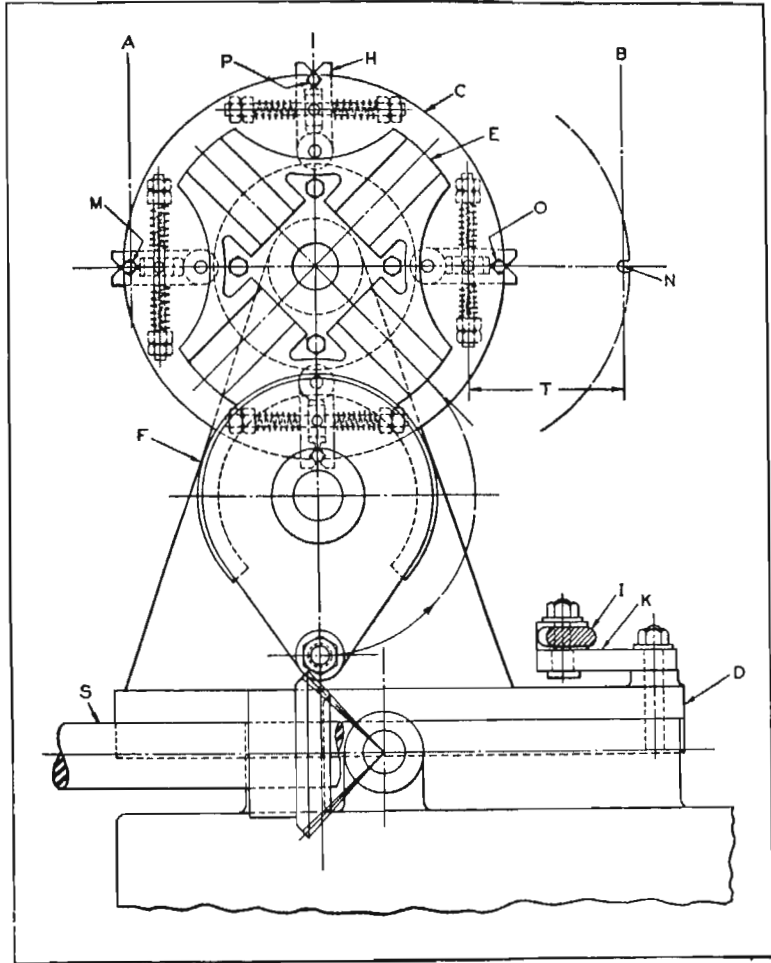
End View of Dial Transfer Mechanism Used in Chain Making Machine.
